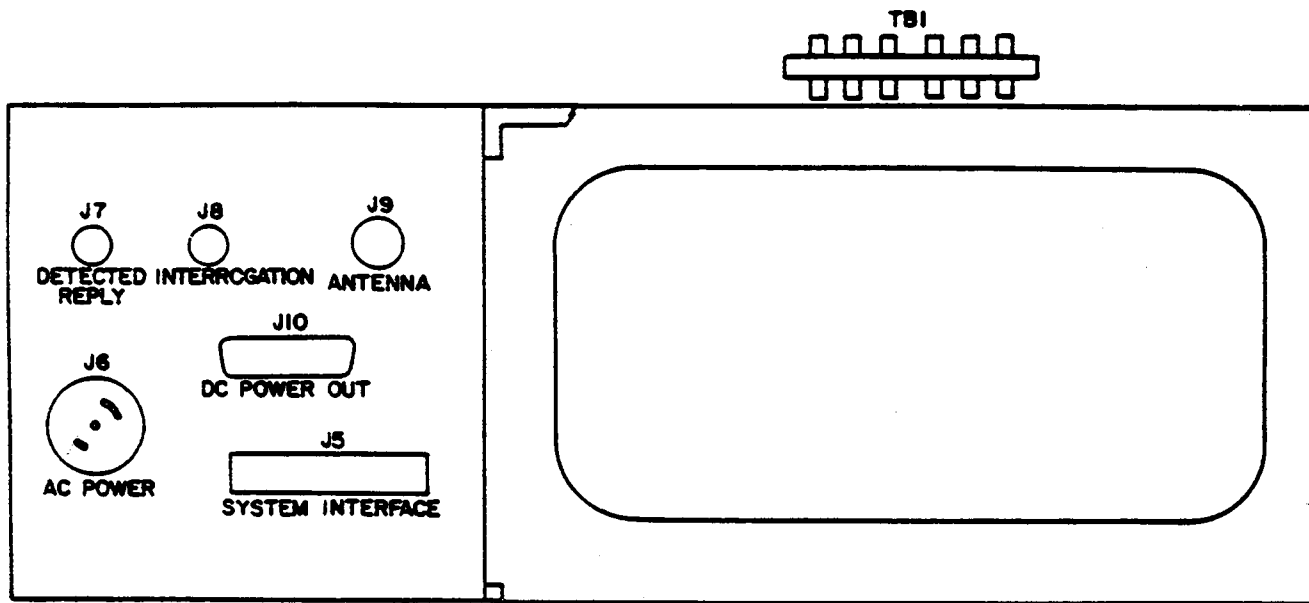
TRANSPONDER ASSEMBLY REAR CONNECTIONS
